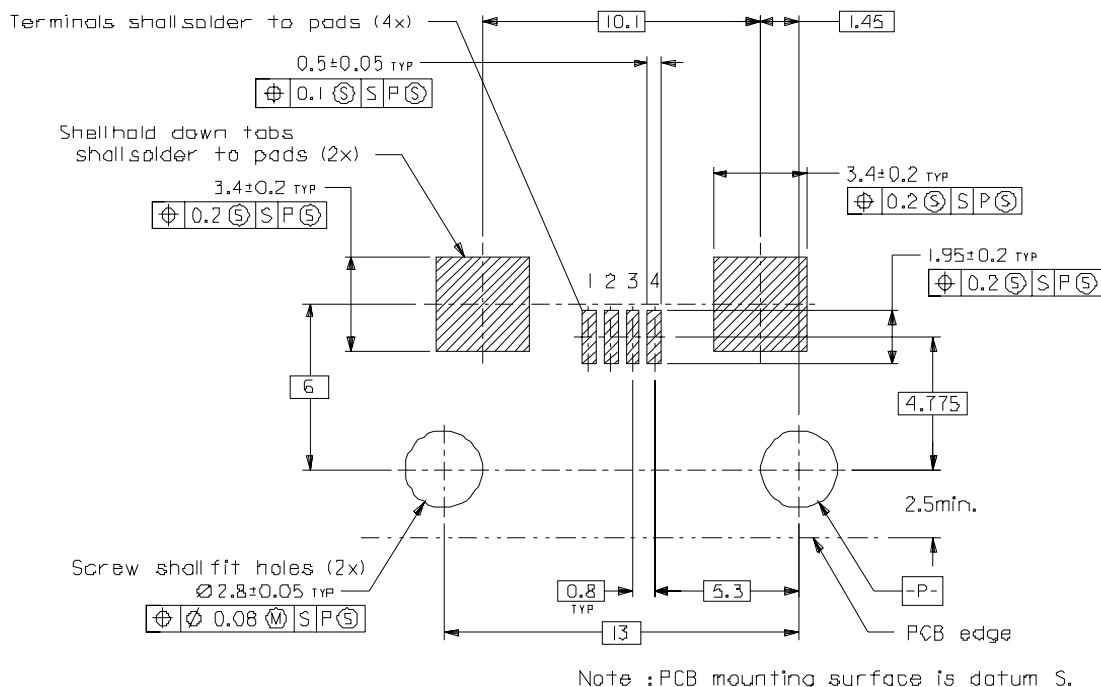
G — Flat surface-mount printed circuit board socket footprint
